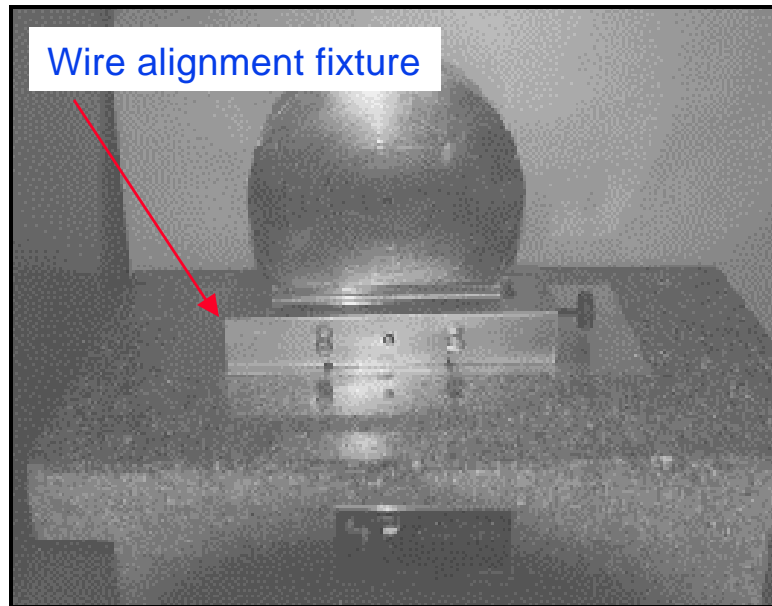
A precision machined, steel fixture was used to produce correct wire alignment on the substrates.
